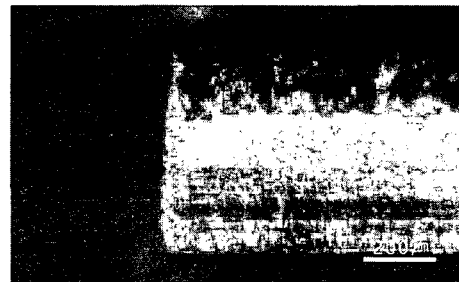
Inner surface of the hole punched in SPCC sheet. Thickness of he sheet is 1 mm. Hole diameter is 11. 73mm
